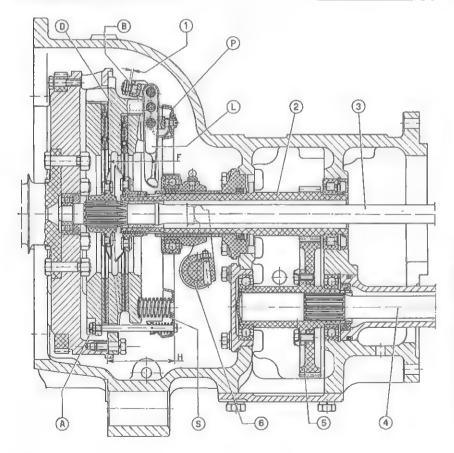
Cross-section of engine clutch and P.T.-O. drive gears.
